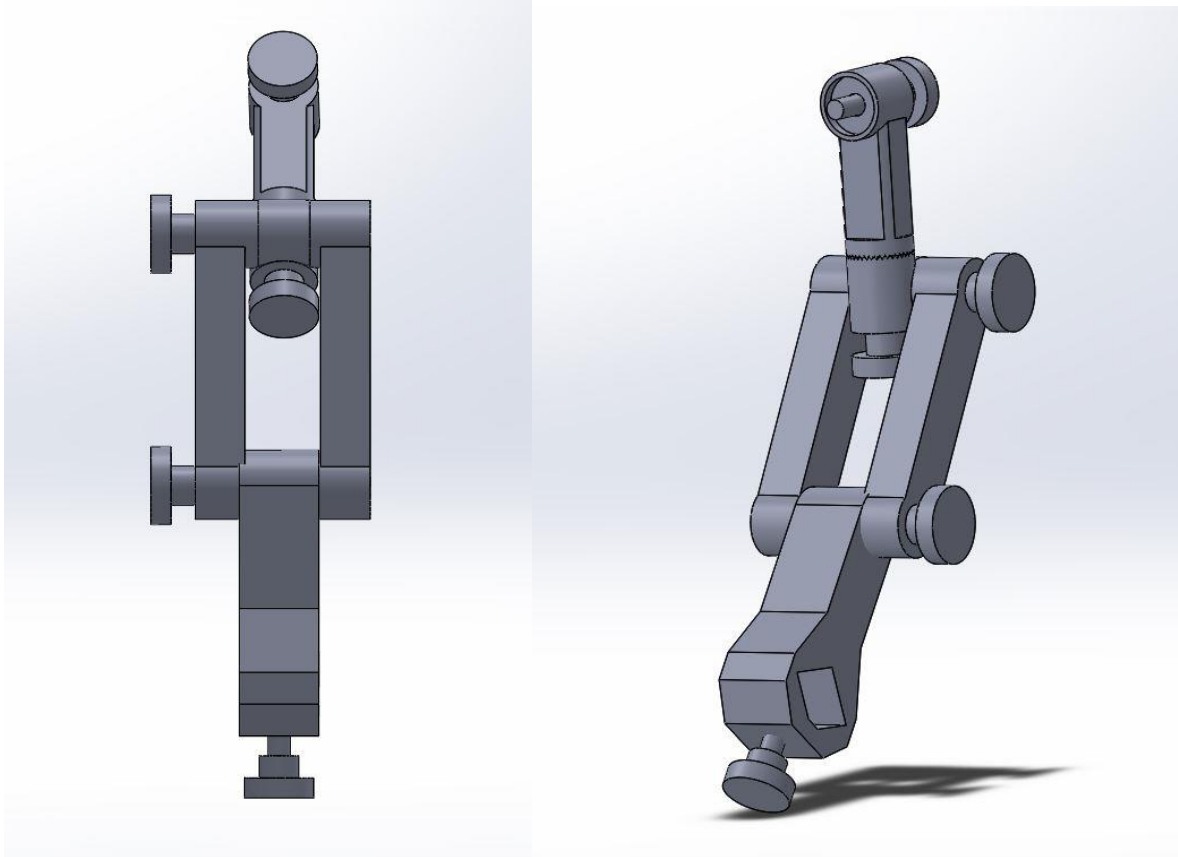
Back and isometric views of the modeled clam system made using Solidworks
